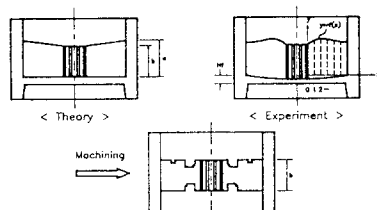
Schematic dimensions of initial billet, preform and final extruded product
